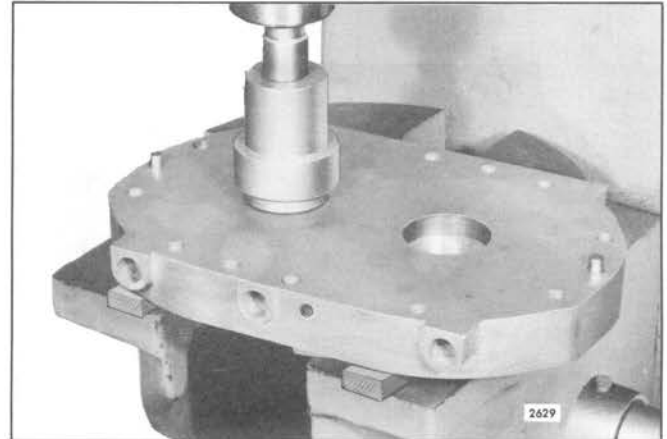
Installing Oil Seal (or Oil Seal Ring Collar) in End Plate using Tool J 6270-3
